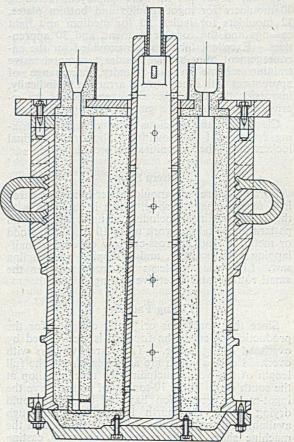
Section through the Ingot-Mould Set-up Ready for Casting.
